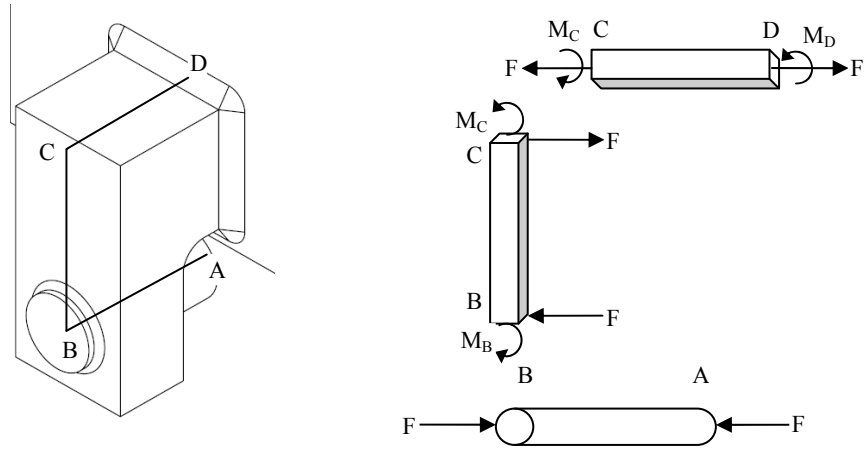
Free Body Diagram of Aligner Pin and Bracket Assembly
